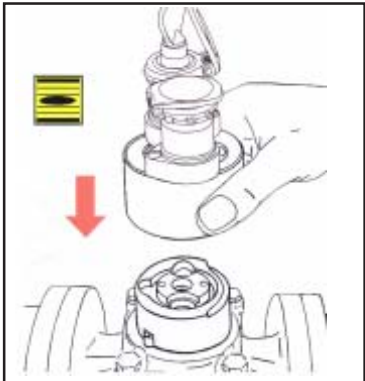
Position lock body onto adaptor/anchor. Ensure lock moves freely through 90° with key/keys inserted.
